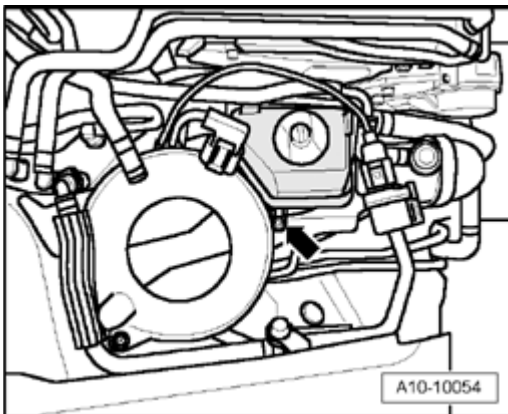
Removing Securing Bolt For Power Steering Reservoir
